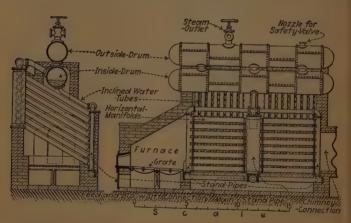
Twibill's sectional water-tube boiler (year 1865).
